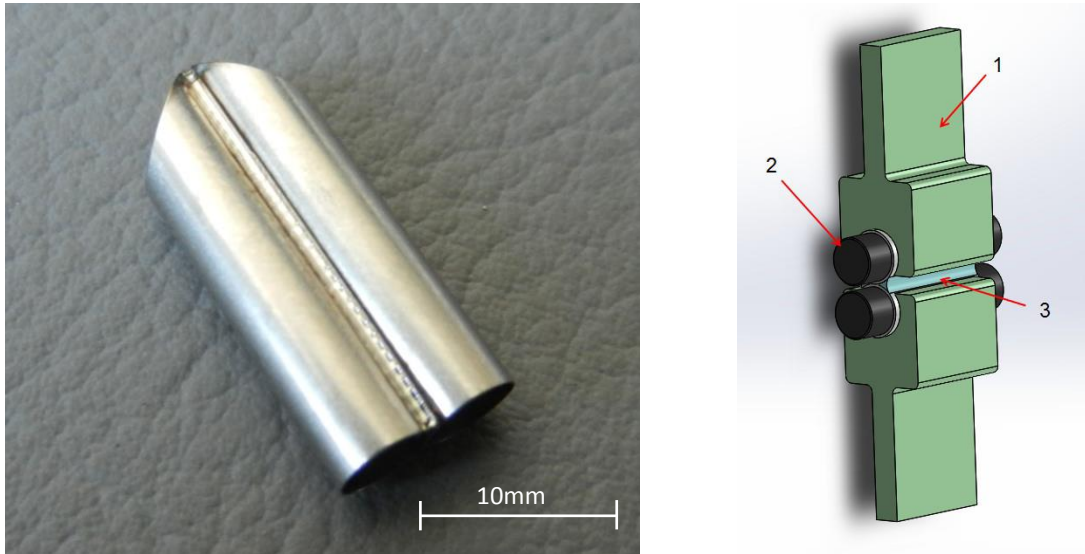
Samples welded with filler wire and test assembly for tensile tests with modified sample geometry. (1) device for holding the capillary tubes; (2) calibration pin; (3) welded joint
